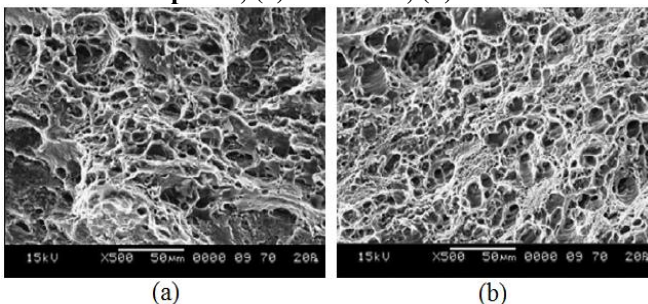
SEM image of centre of tensile tested workpieces; (a) as-welded; (b) PWHT
